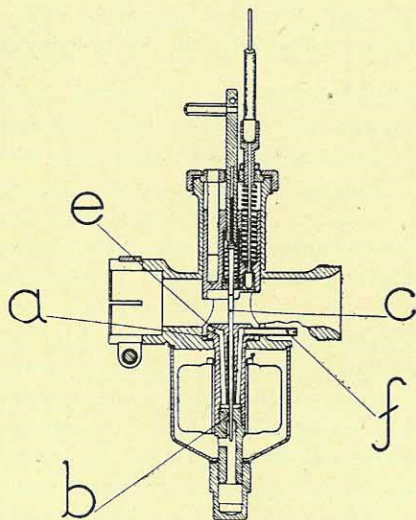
SECTIONAL ARRANGEMENT OF SINGLE-LEVER CARBURETTER.
